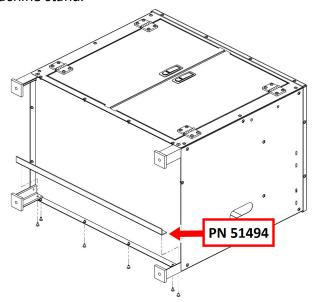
Attaching the bottom stiffener to the back of the machine stand.
